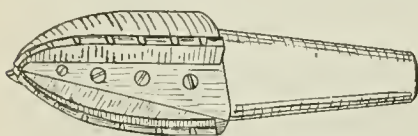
ACORN TYPE OF HEAD FOR MACHINING INTERIOR PROFILE OF NOSE.
